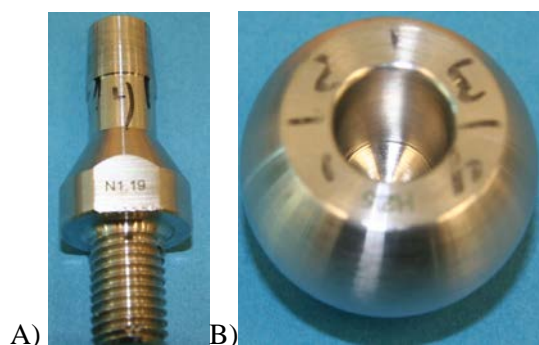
Corrosion and fretting damage of a neck component (A) and the corresponding 36 mm femoral head (B) after axial fatigue loading.
